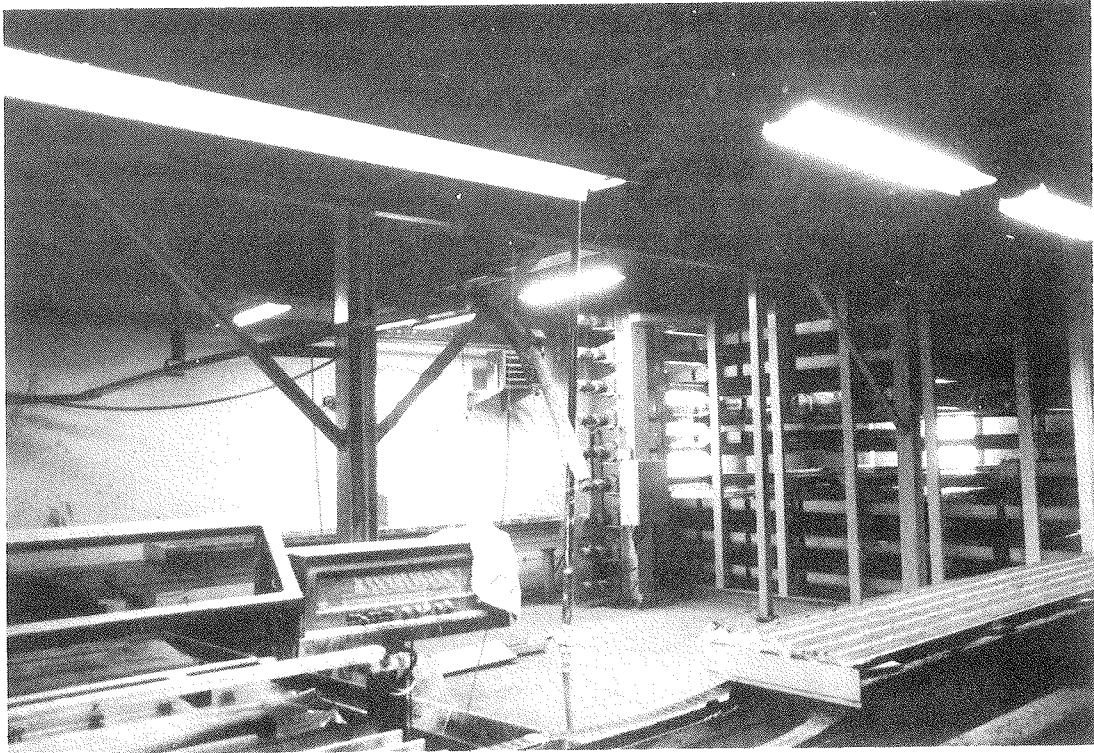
Room 2 with the semi-automatic system for handling and storing the brick beams during the drying-out period.
